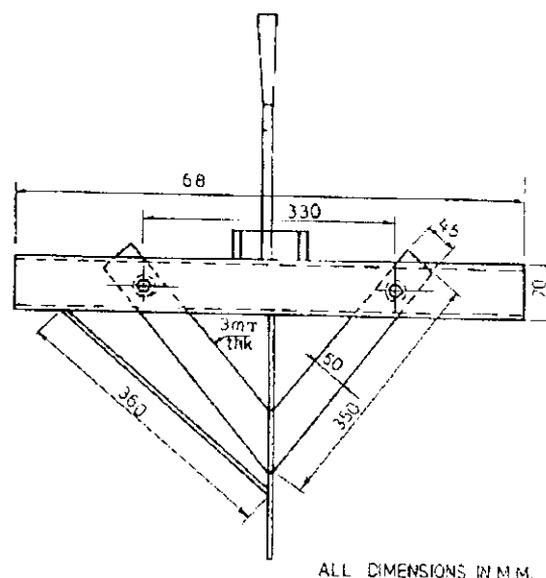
Groundnut digger ('V' shaped digging blade type)
